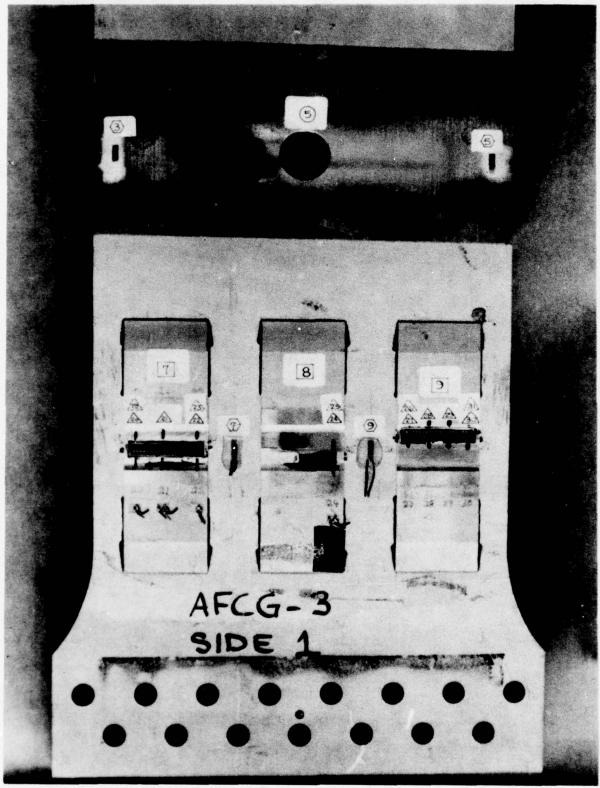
Photograph of Specimen AFCG-3 Side 1 Detail
